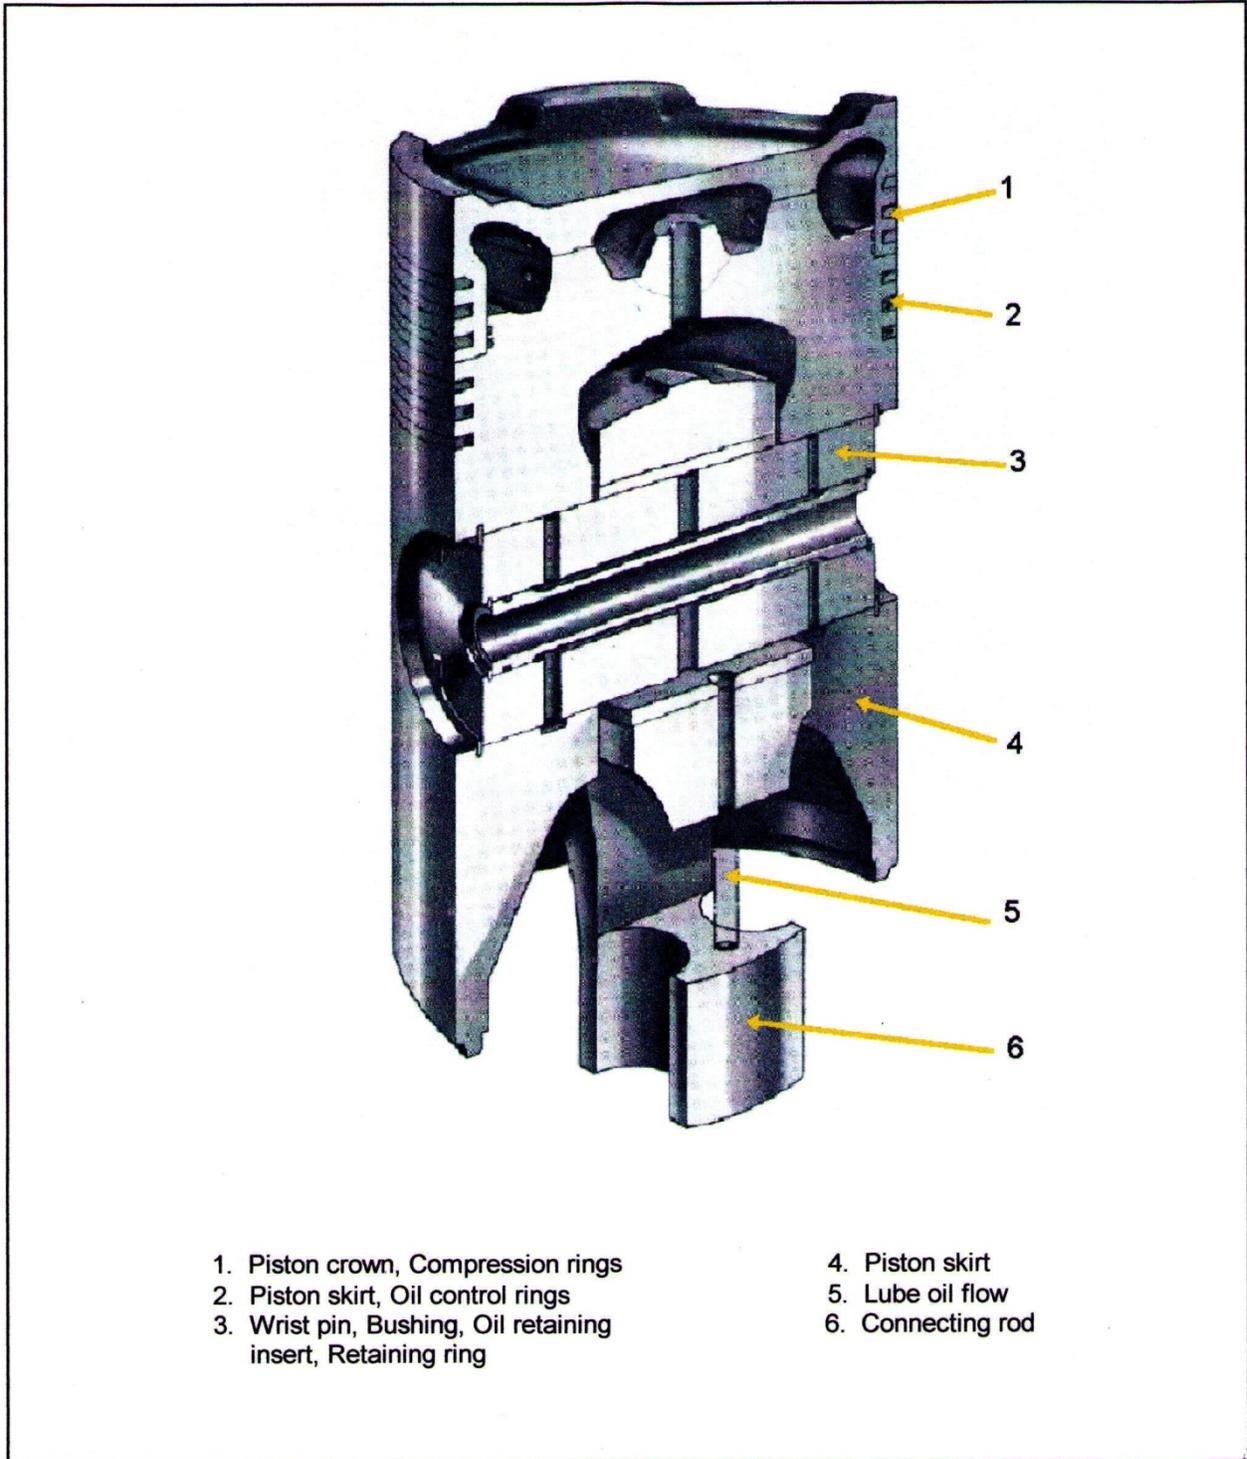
Two-piece Crown Piston with Connecting Rod & Wrist Pin Assembly
